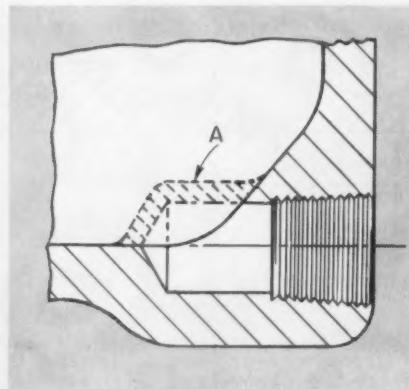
Providing boss on inside surface opposite drain eliminates drilling half-hole.
